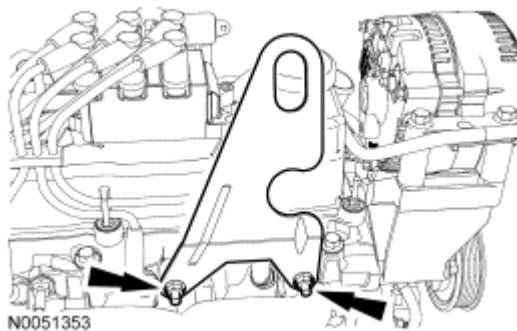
Locating Nuts & RH Engine Lifting Eye
